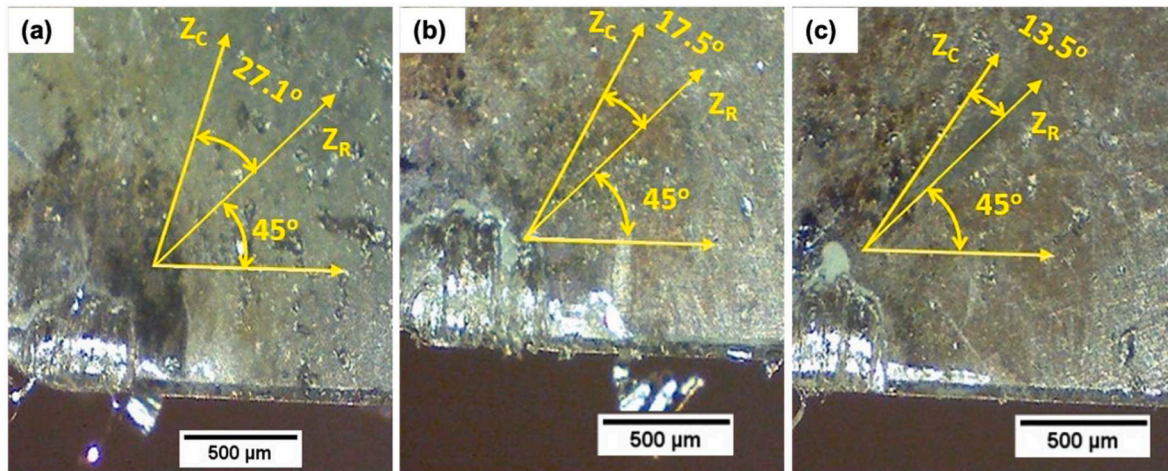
Measurement of chip flow angle using chip sliding marks on (a) uncoated, (b) TiSiN coated and (c) TiSiVN coated cutting tool after machining at 50 m/min cutting speed.
